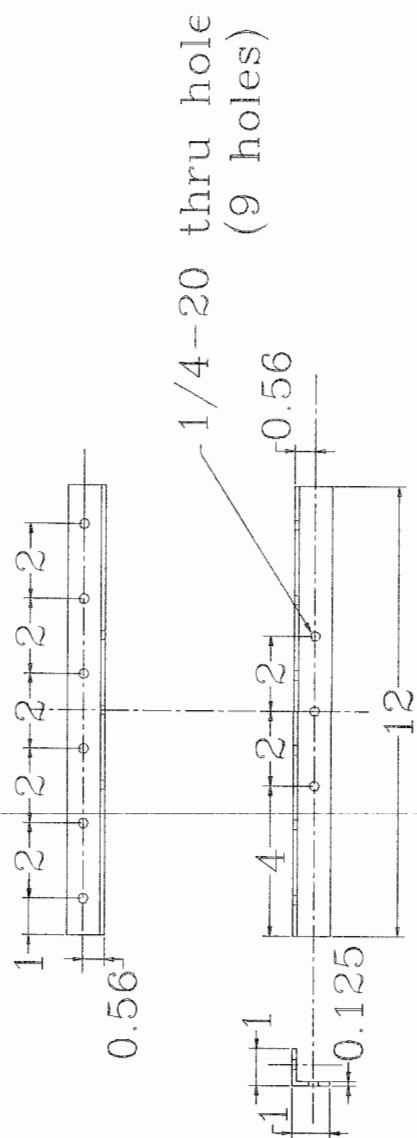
Part No. 11 Base to U Shaped Portion Mounting Bracket
